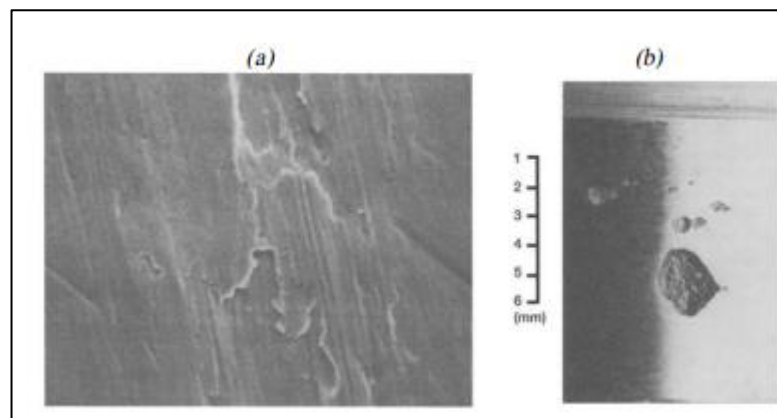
Examples of wear scar presences because of fatigue wear technique. (a) Spalling wear and (b) Pitting wear [61].
